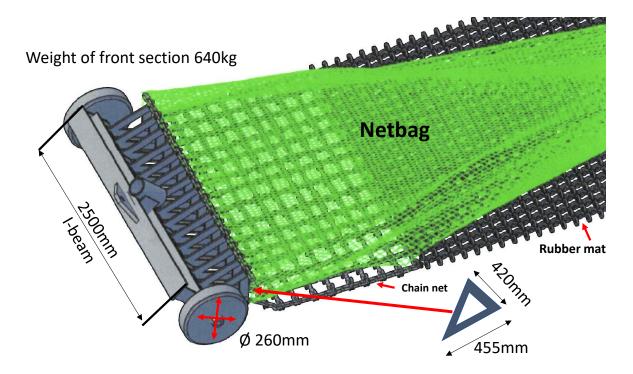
The dimensions of the "Berg's gear". Only the front part is used during trials. Total weight of the Berg's gear is 1000 kg.
